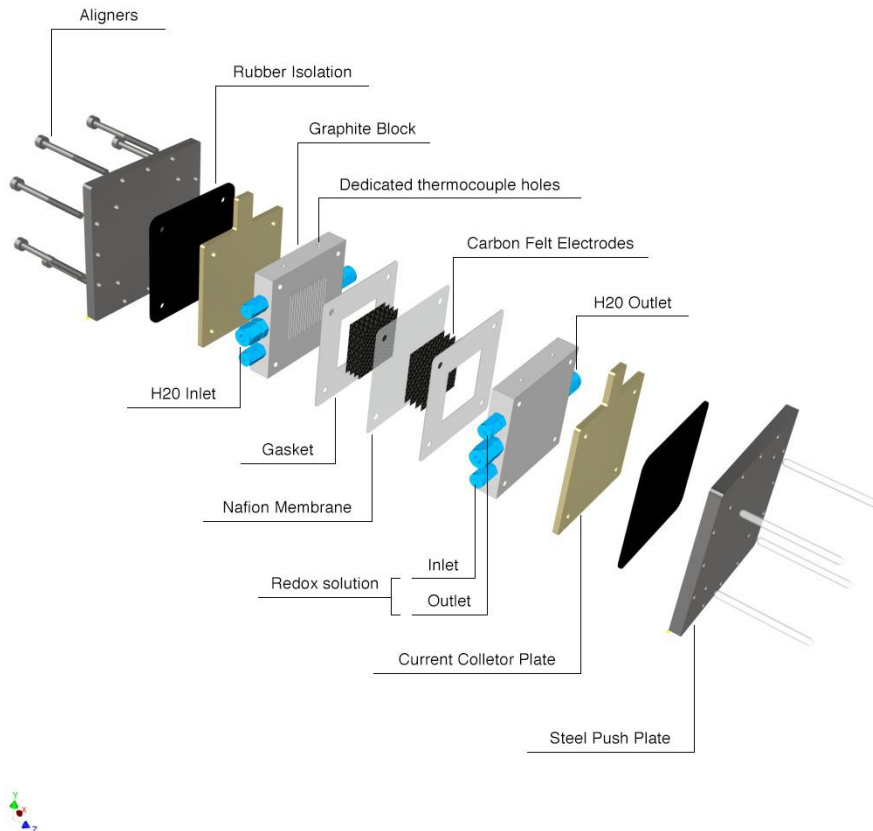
Exploded view of single cell with all of its components (Figure was adapted from references 20. and 21.)
